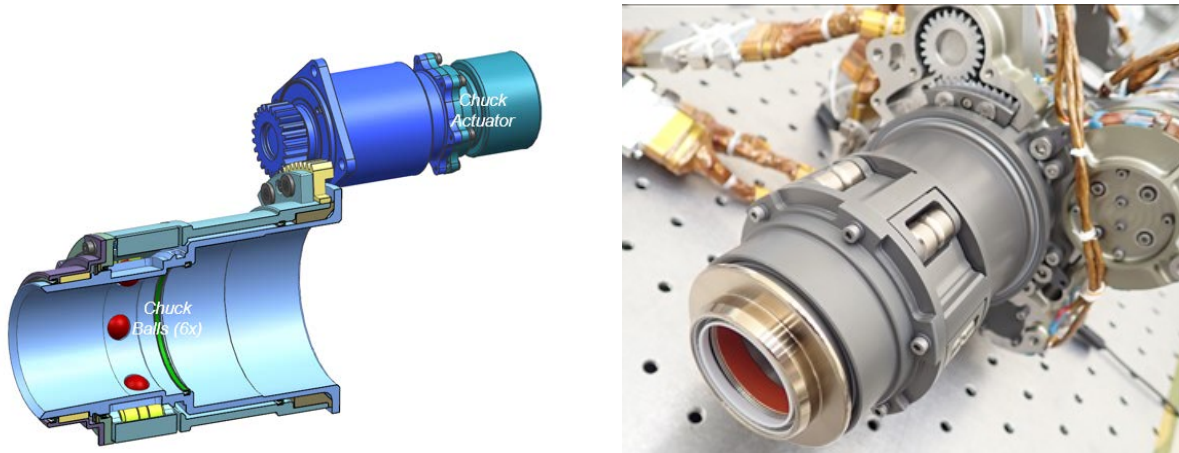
(Left) CAD view of chuck actuator interfacing with mechanism via segmented gear. (Right) View of chuck mechanism engaged with bit sleeve. Note the exposed gear mesh between the chuck actuator output pinion and segmented gear. Segmented gear is fastened to the cam.
